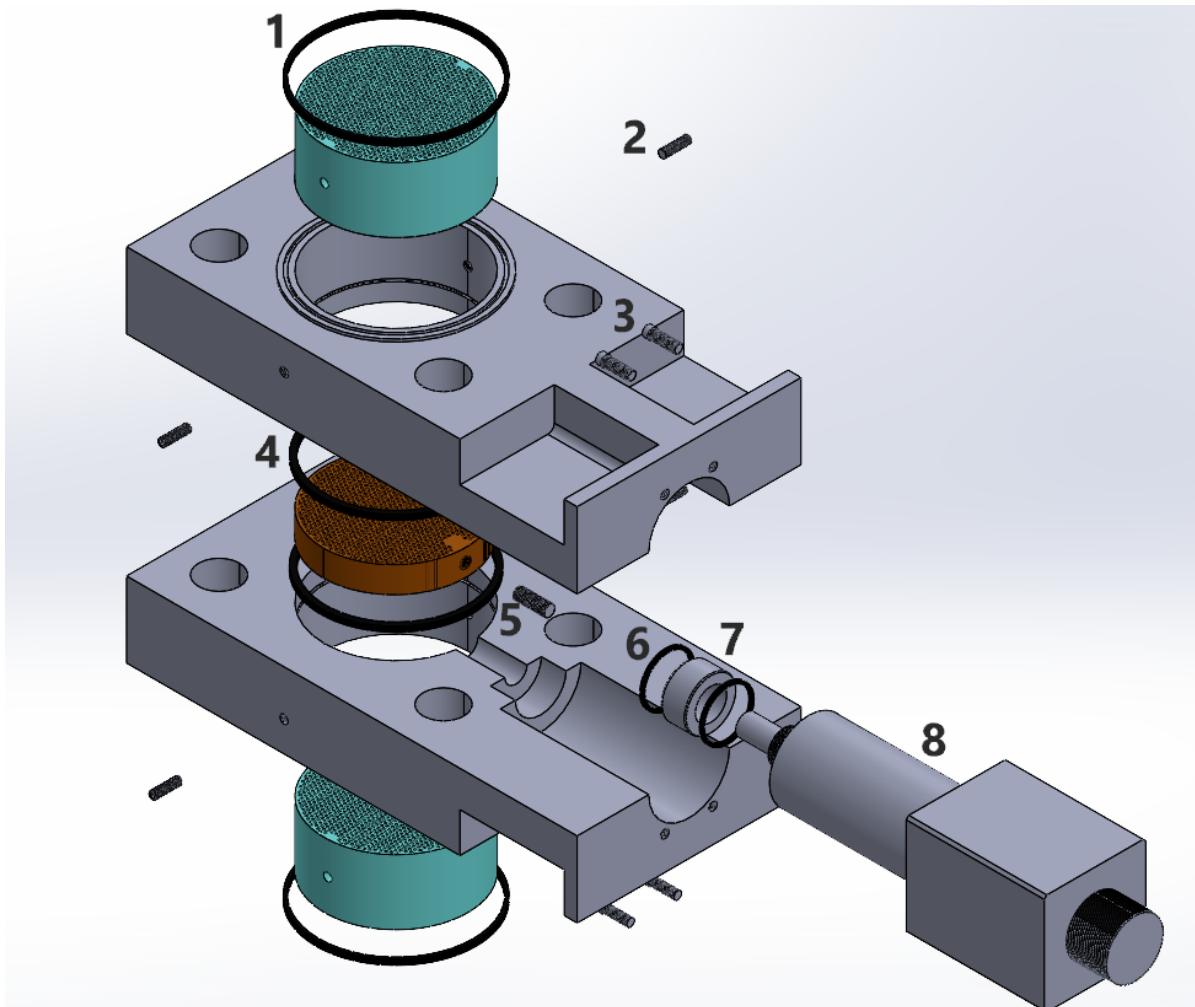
Complete assembly of the Dynamic Configuration set-up
